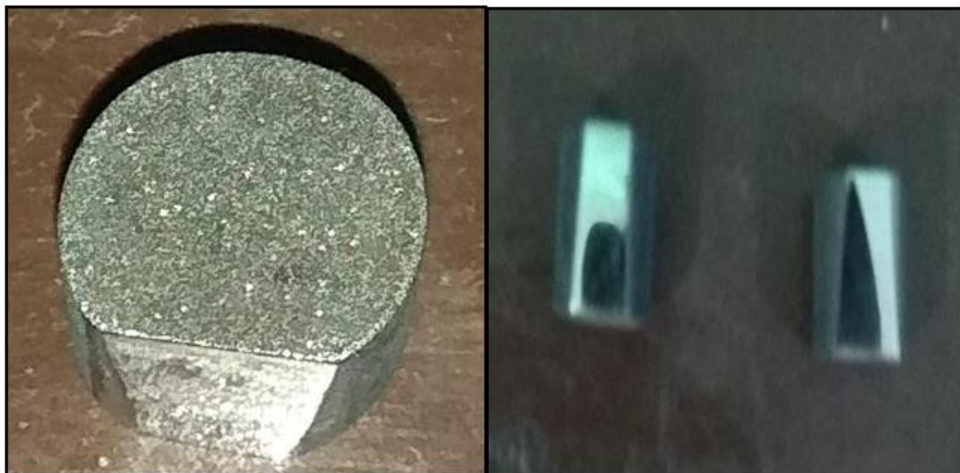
(a) Top surface image of c-BN diffused layer; (b) Side view of c-BN diffused layer
